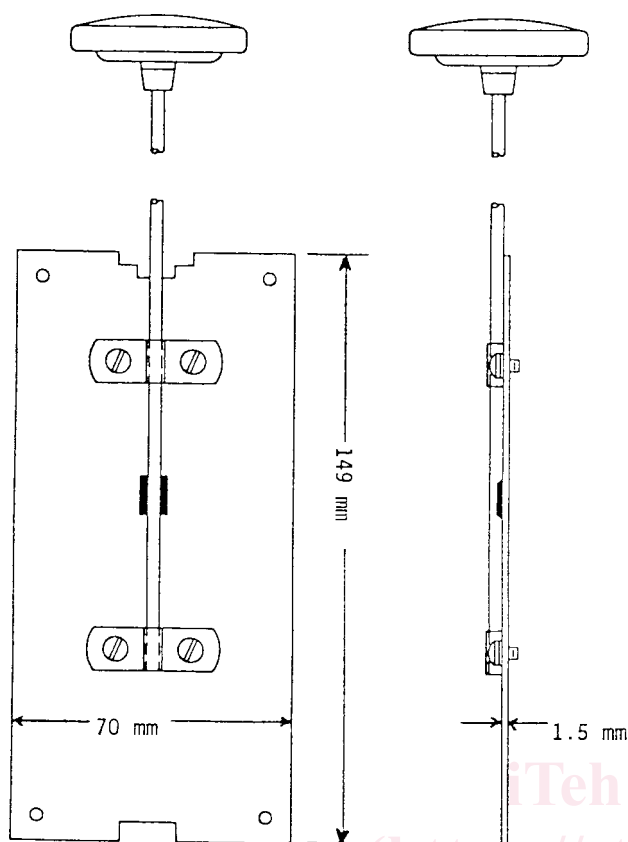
Black Panel Thermometer Unit Using Dial Type Thermometer
